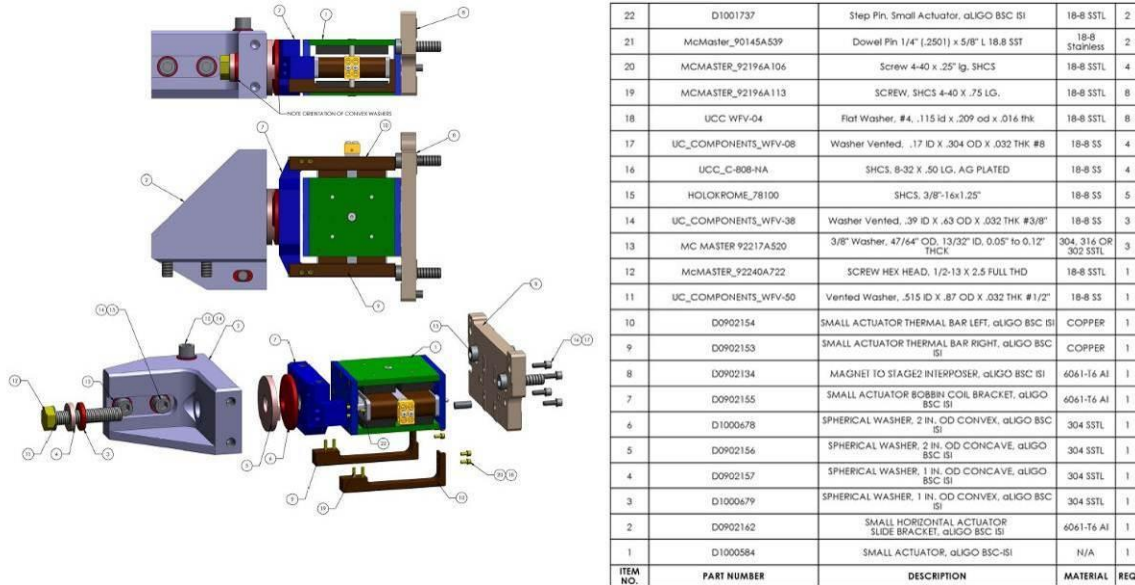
D0902530 Stage 1-2 Horizontal Actuators Assembly
